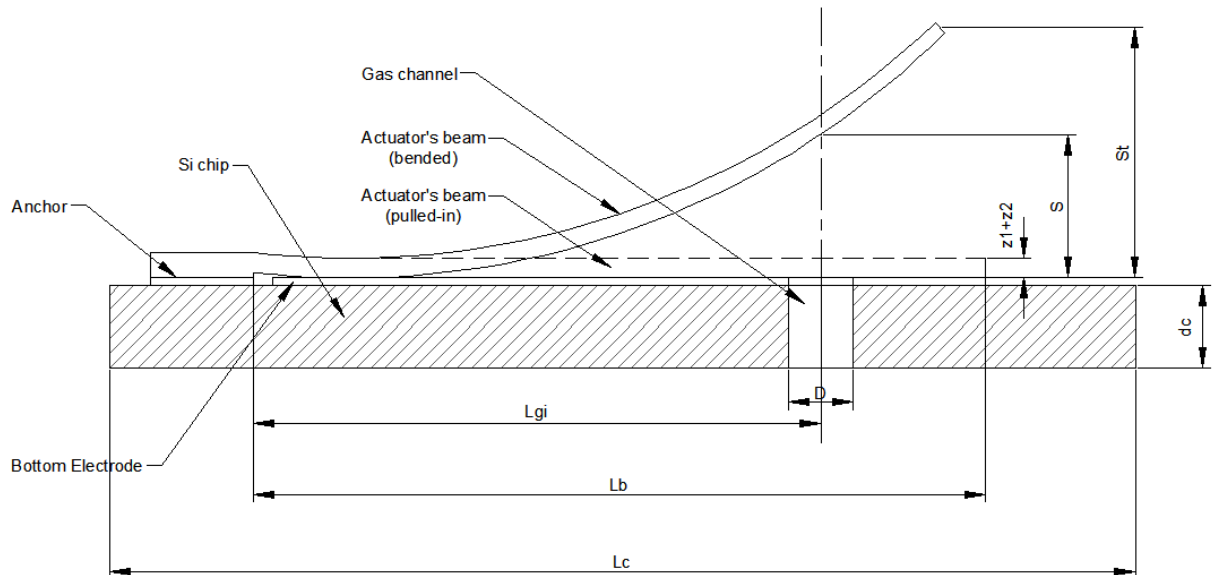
A cross-sectional view of a microvalve chip with basic dimensions (not to scale)
